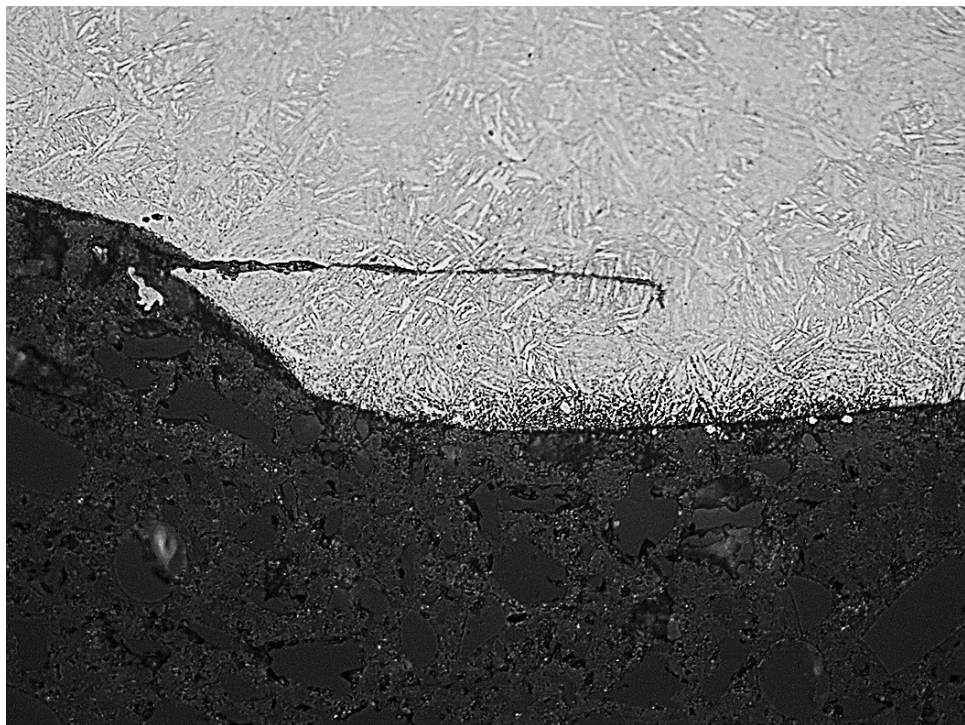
Serial metallographic sections, plane of sectioning parallel with the journal surface
